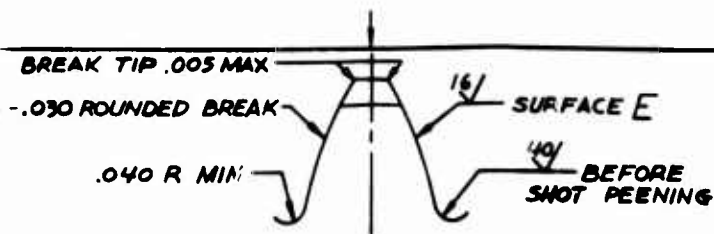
Fatigue Test Gear Configuration 4—EX-78775.
